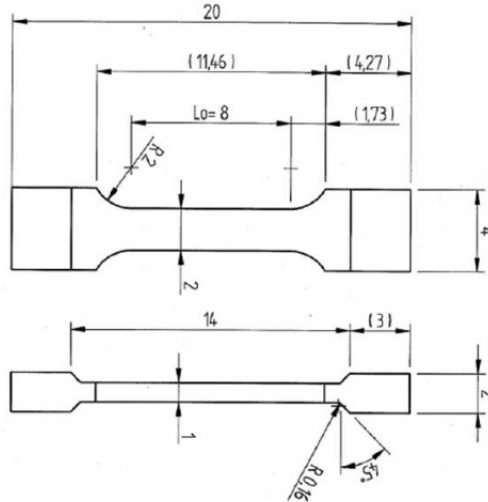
Schematic of a tensile specimen dimension in millimeters.
